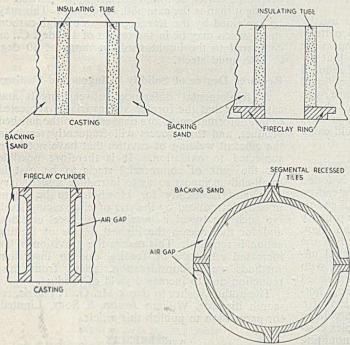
Various Types of Feeder Head. Top left—Insert of Insulating Material; Top Right—Insert of Insulating Material, and Fireclay Ring at the Base; Bottom Left—Thin Fireclay Cylinder and Air Gap; Bottom Right—Cross-section of Large Feeder Head fitted with Four Segmental Recessed Tiles.
